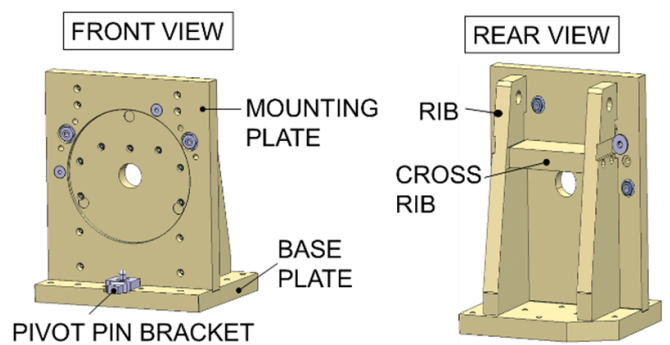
Front and rear view of the M3 mirror mounting listing the key parts.
